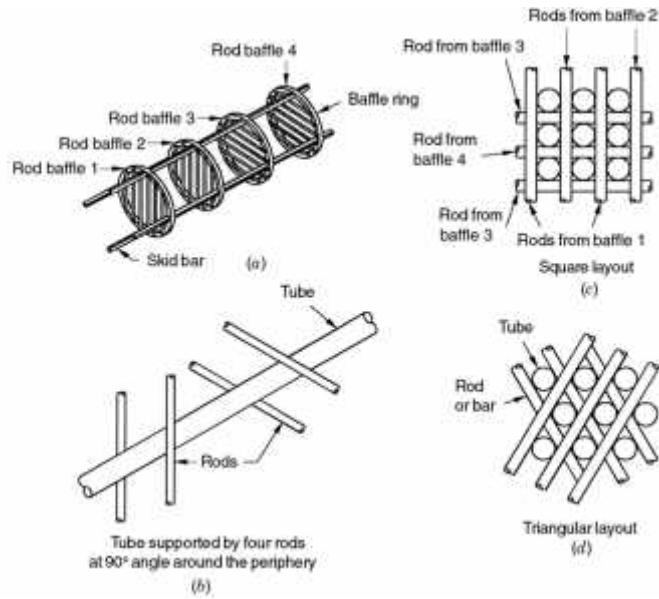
(a) Four rod baffles held by skid bars (no tubes shown); (b) tube in a rod baffle exchanger supported by four rods; (c) square layout of tubes with rods; (d) triangular layout of tubes with rods (Shah, 1981).
